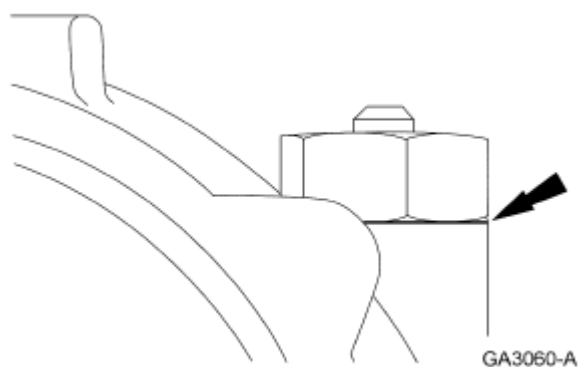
Identifying Connecting Rod Nuts Finger-Tight
